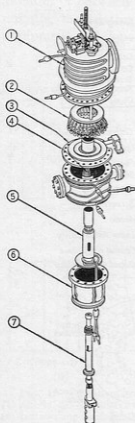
Isometric sketch of disassembled resonator. (1) Tuner housing, (2) tuning plunger ("daisy"), (3) anode, (4) screen-grid assembly, (5) control-grid assembly, (6) cathode and grid insulator, (7) cathode assembly.
